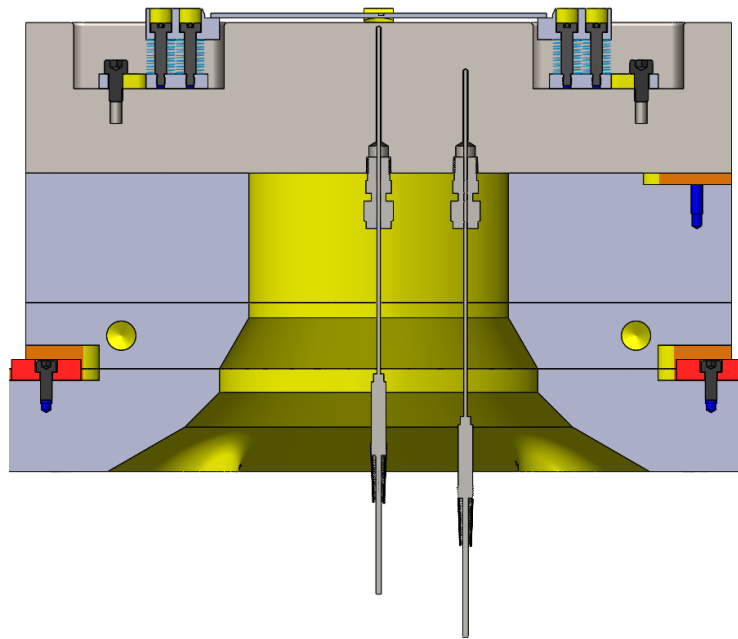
Section view of lower die showing arrangement and mounting of thermcouple probe via compression fittings (arrangement mirrored in the upper die).
